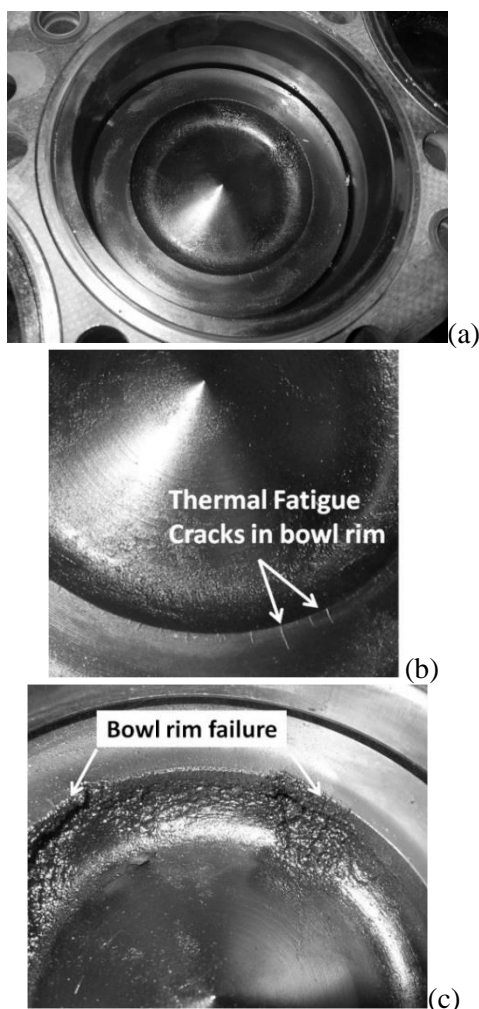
(a) Piston in bore, (b) cracks on inside edges of bowl rim, and (c) bowl rim failure.
